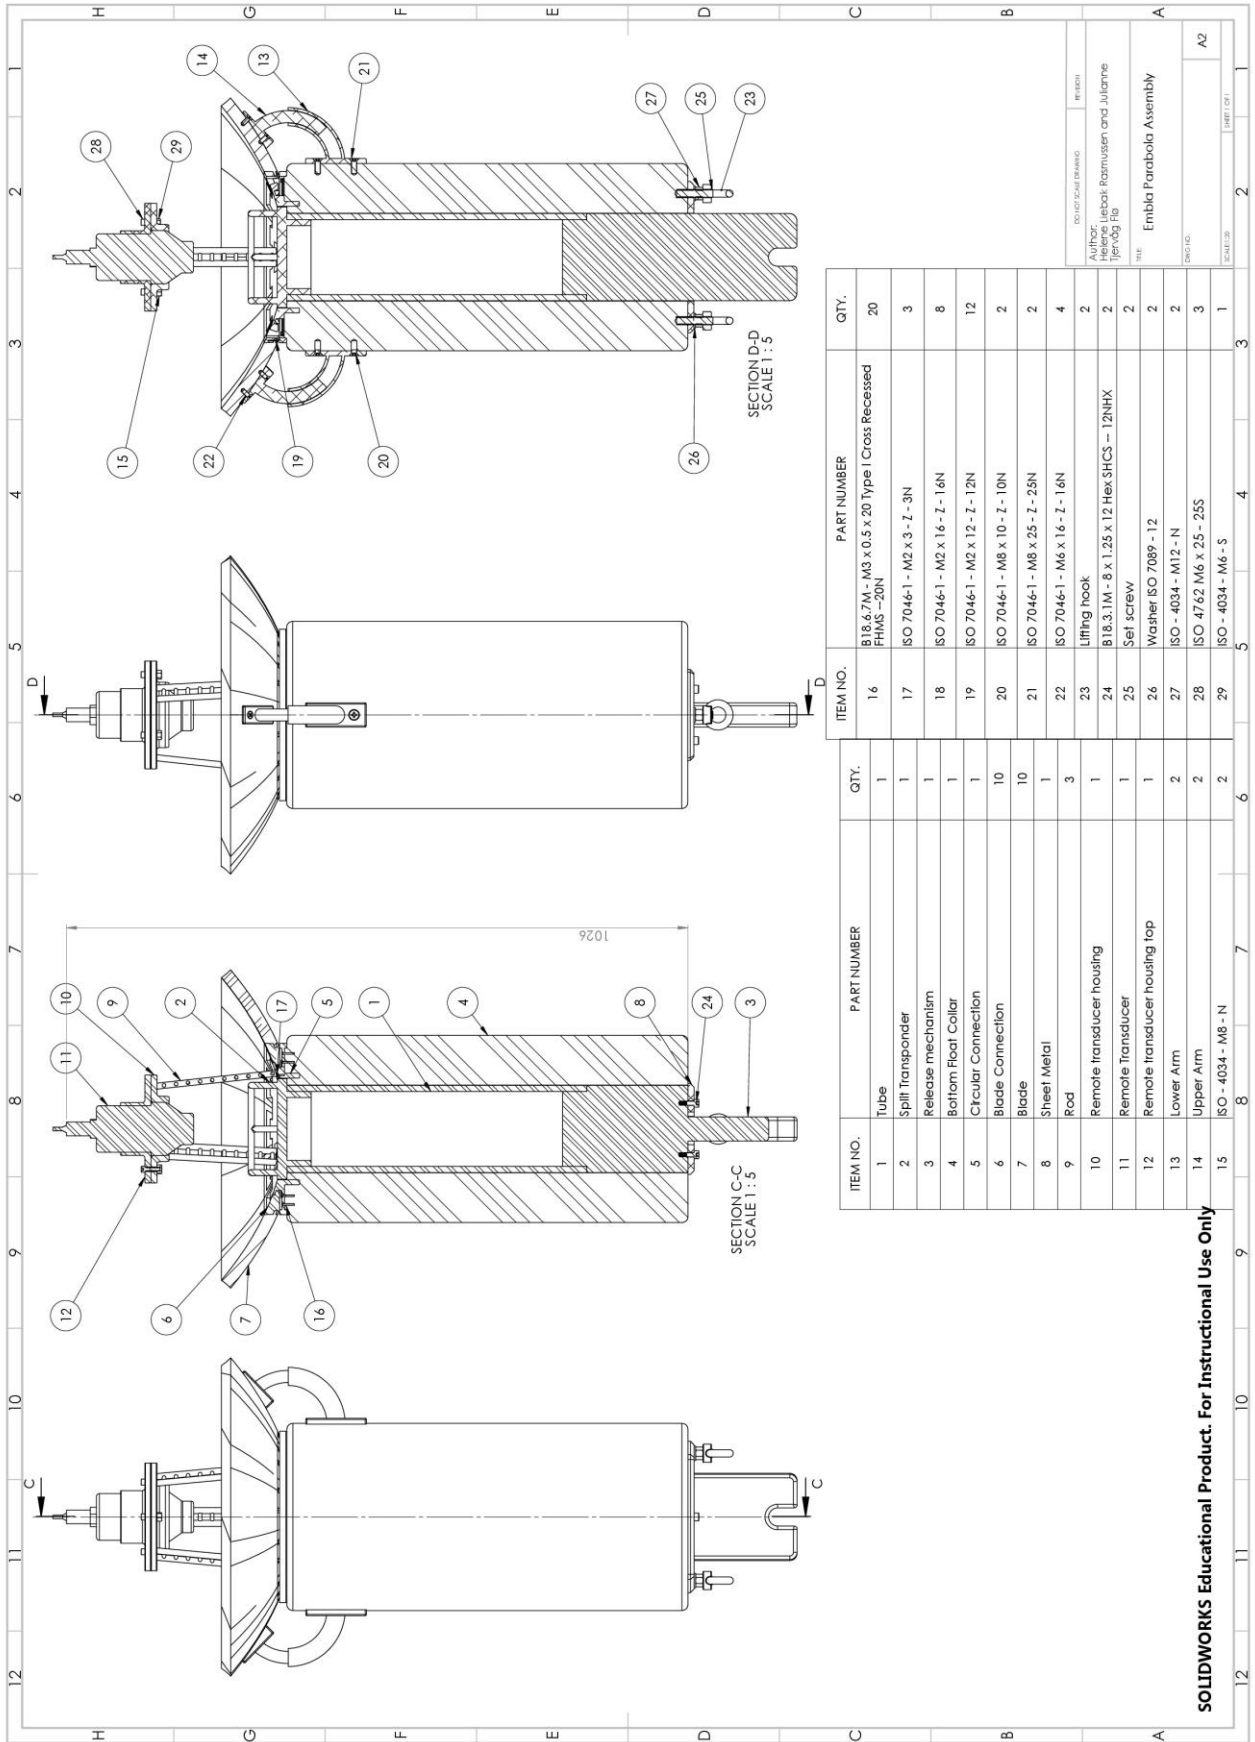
Technical drawing of the entire parabola structure. Created in SolidWorks.
